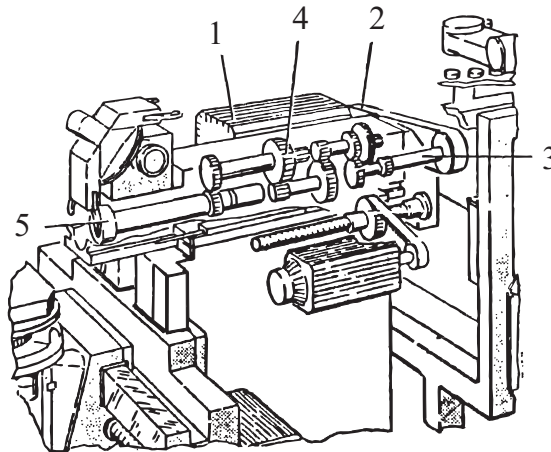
Main drive of a machine center (MAHO MC5). 1 DC motor, 2 belt drive, 3 axle, 4 gear, 5 tool spindle
